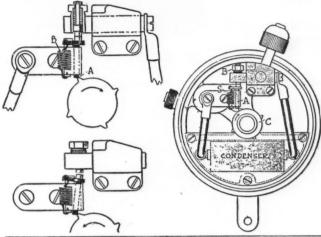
The make and break contact of the Philbrin system are shown to the left. Should the cam be rotated in the wrong direction below to the left the trigger is kicked out of the way
